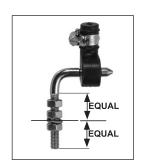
INITIAL BRACKET LOCATION ON THE ADJUSTABLE LINKAGE
